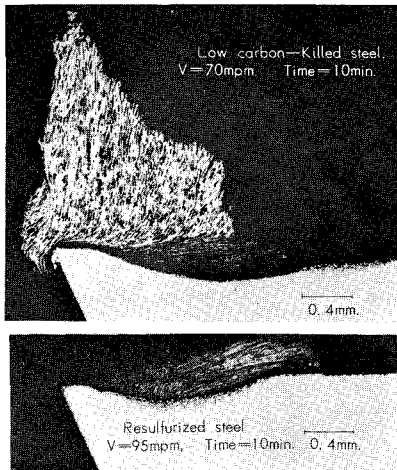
Photographs of section through tool-chip interface after cutting to 10 minute respectively.
